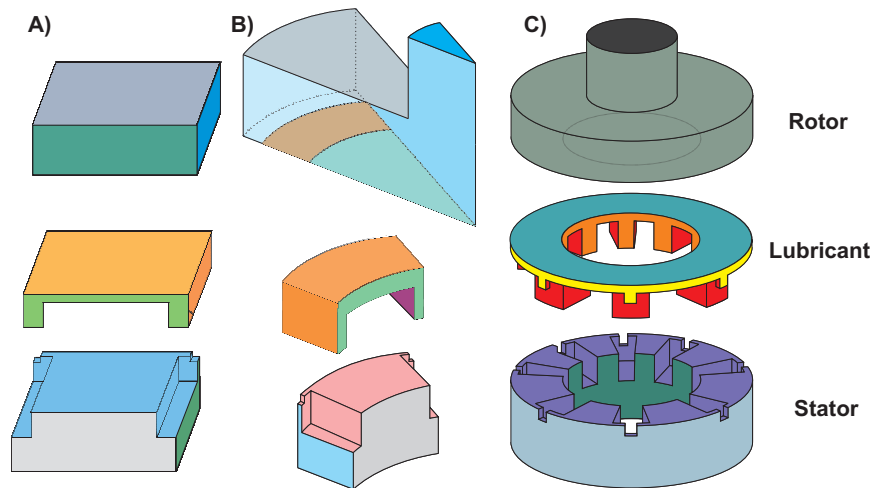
A) Slider geometry, B) Single sector pad geometry, C) Full thrust bearing geometry.
